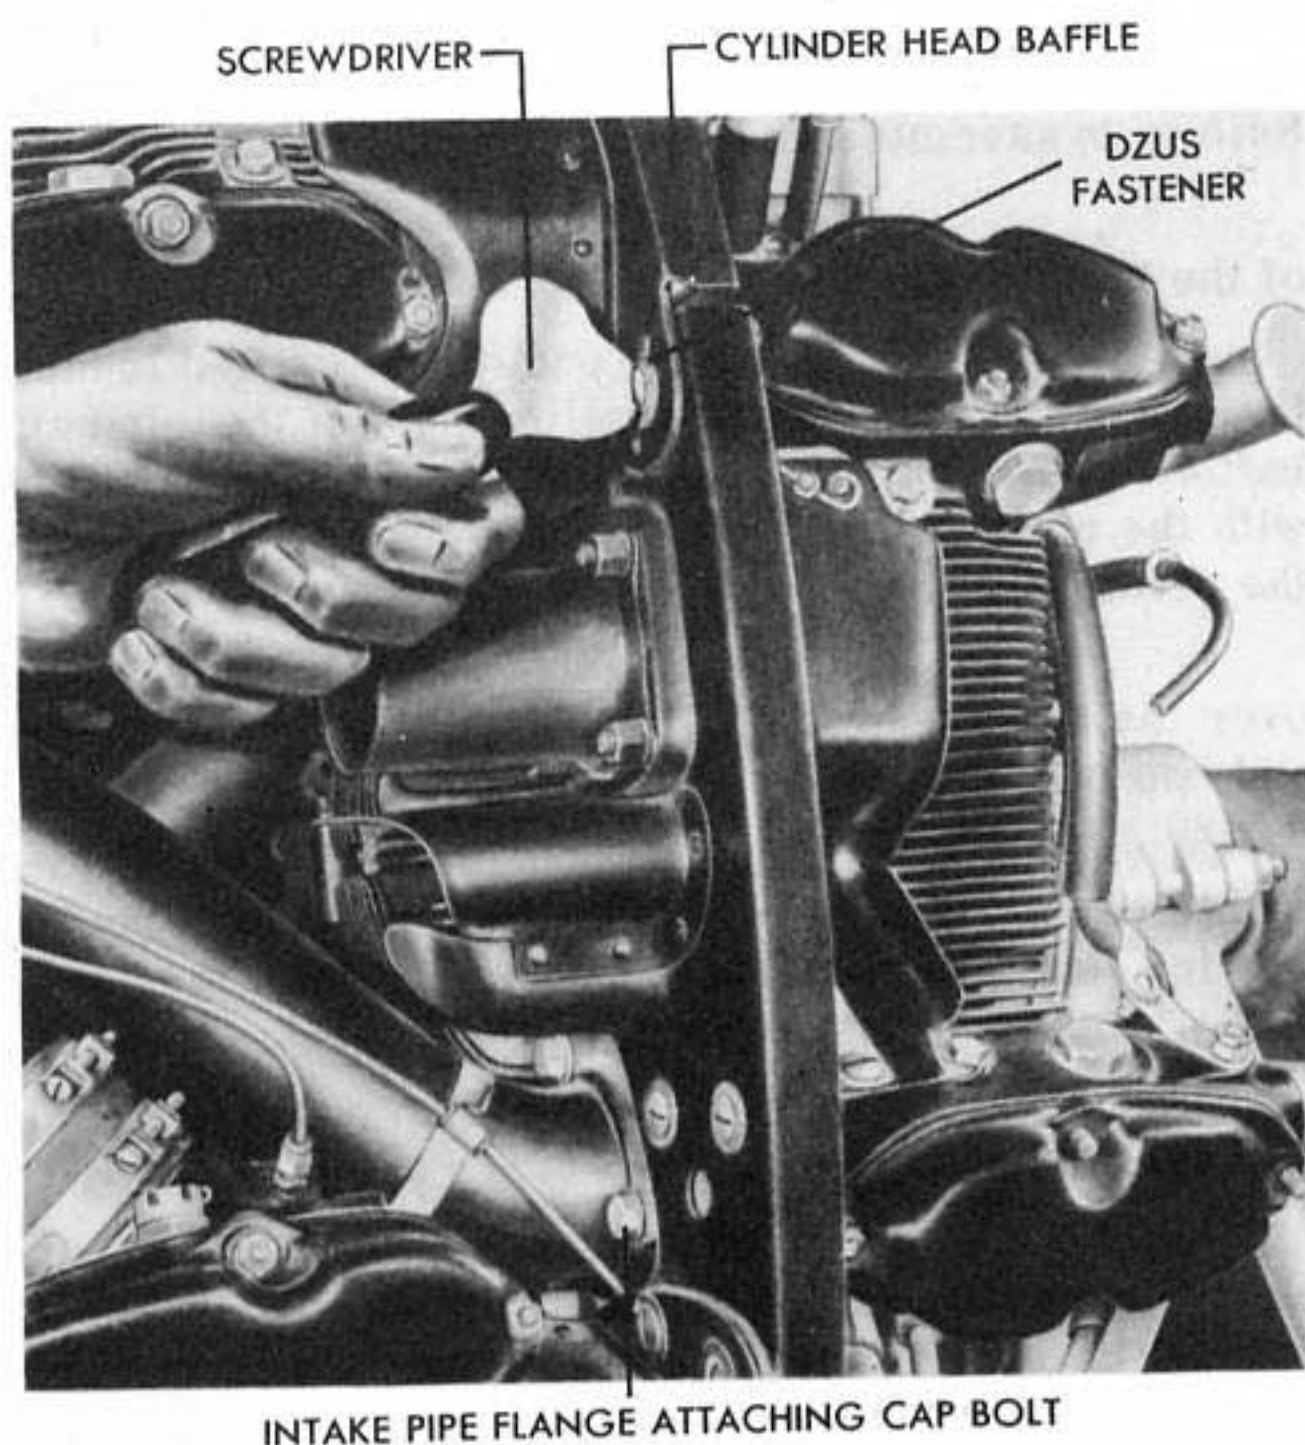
INSTALLING FRONT ROW CYLINDER HEAD BAFFLES
